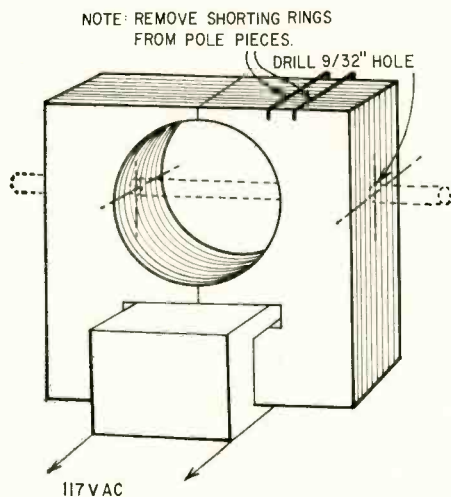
Salvage the stator coil and frame from a phonograph motor. Discard the rotor and shorting rings and drill the holes.
